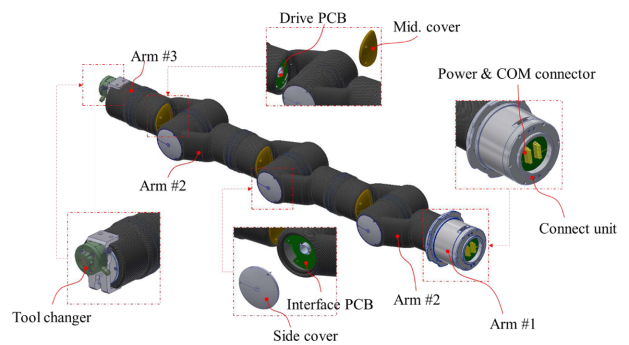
External parts configuration of weld manipulator (6DOF)
